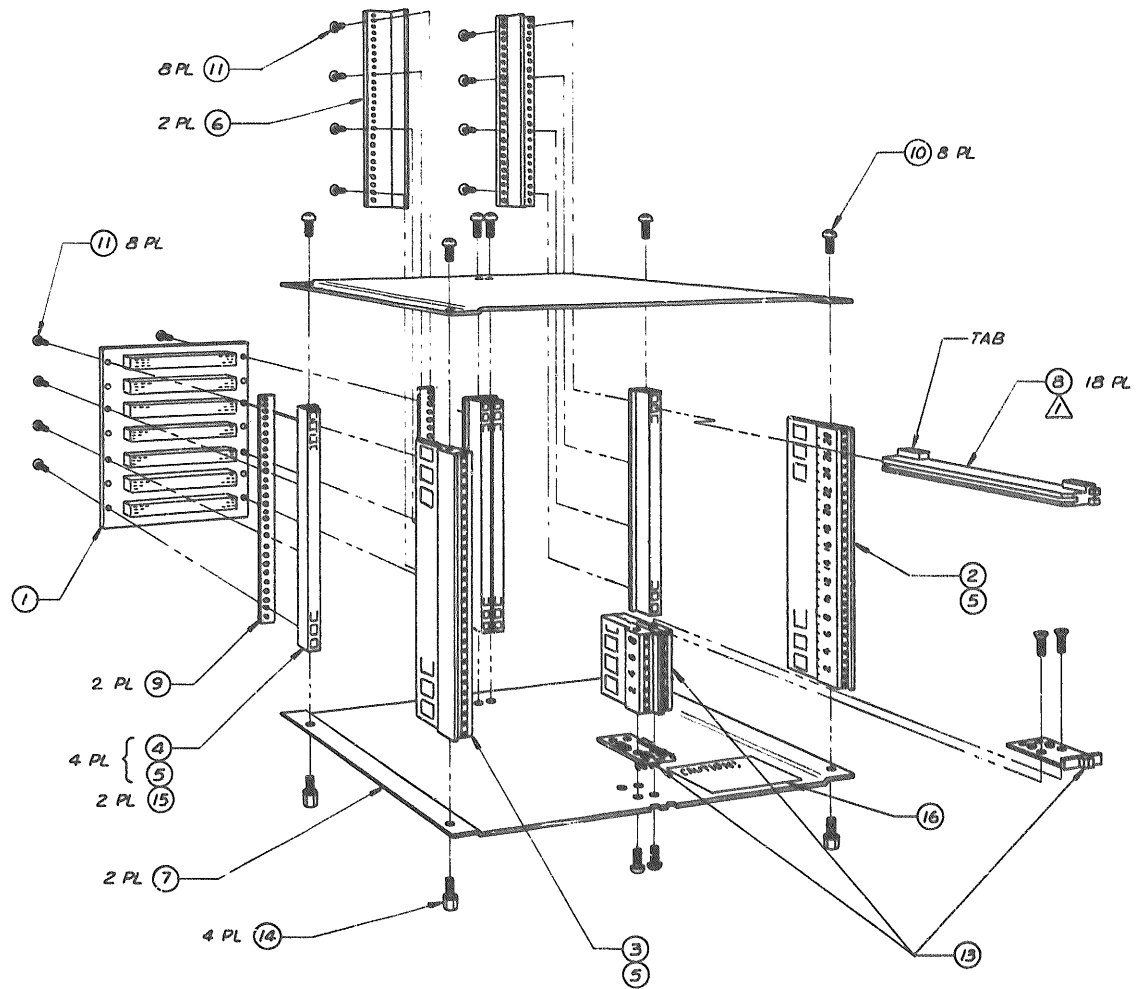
I/O module Expansion Card Cage Assembly Diagram
